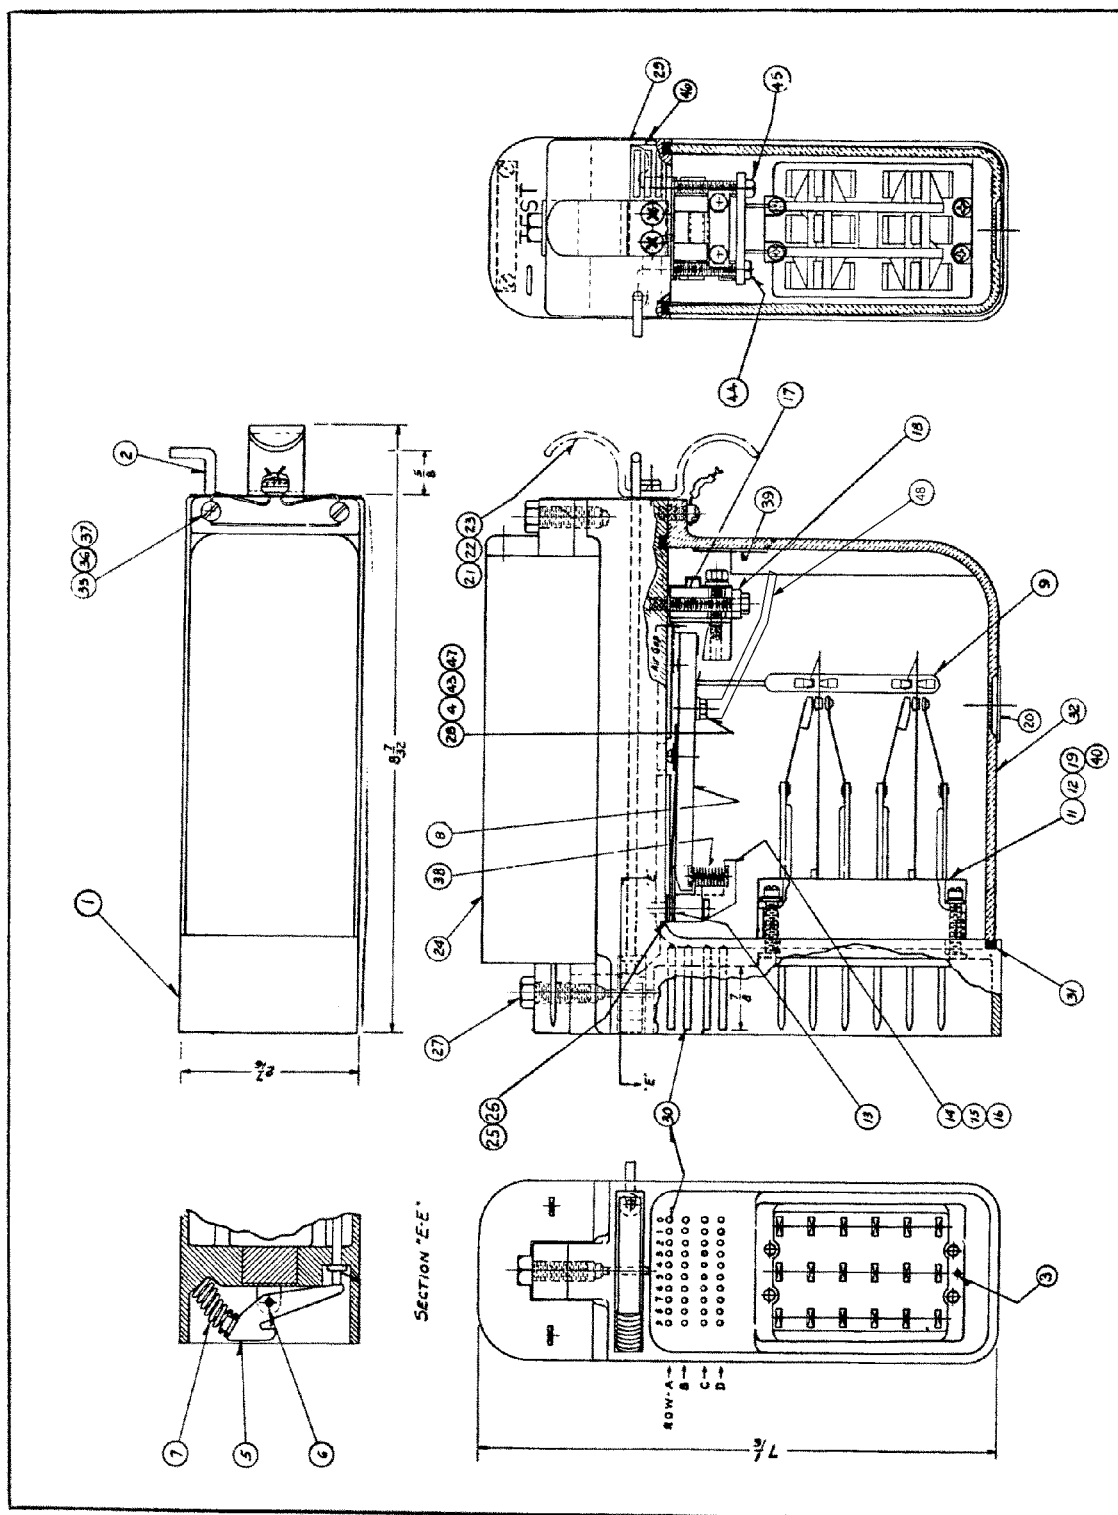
PN-150B Relays With One Piece Molded Contact Driver
